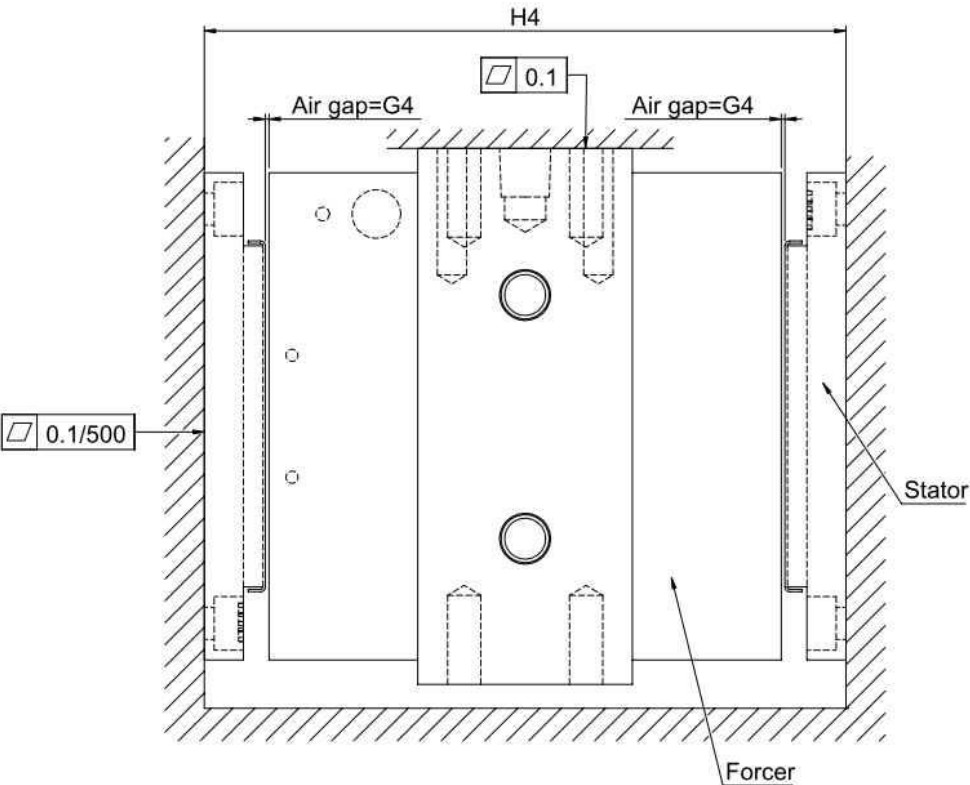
LMSC double thrust linear motor assembly
